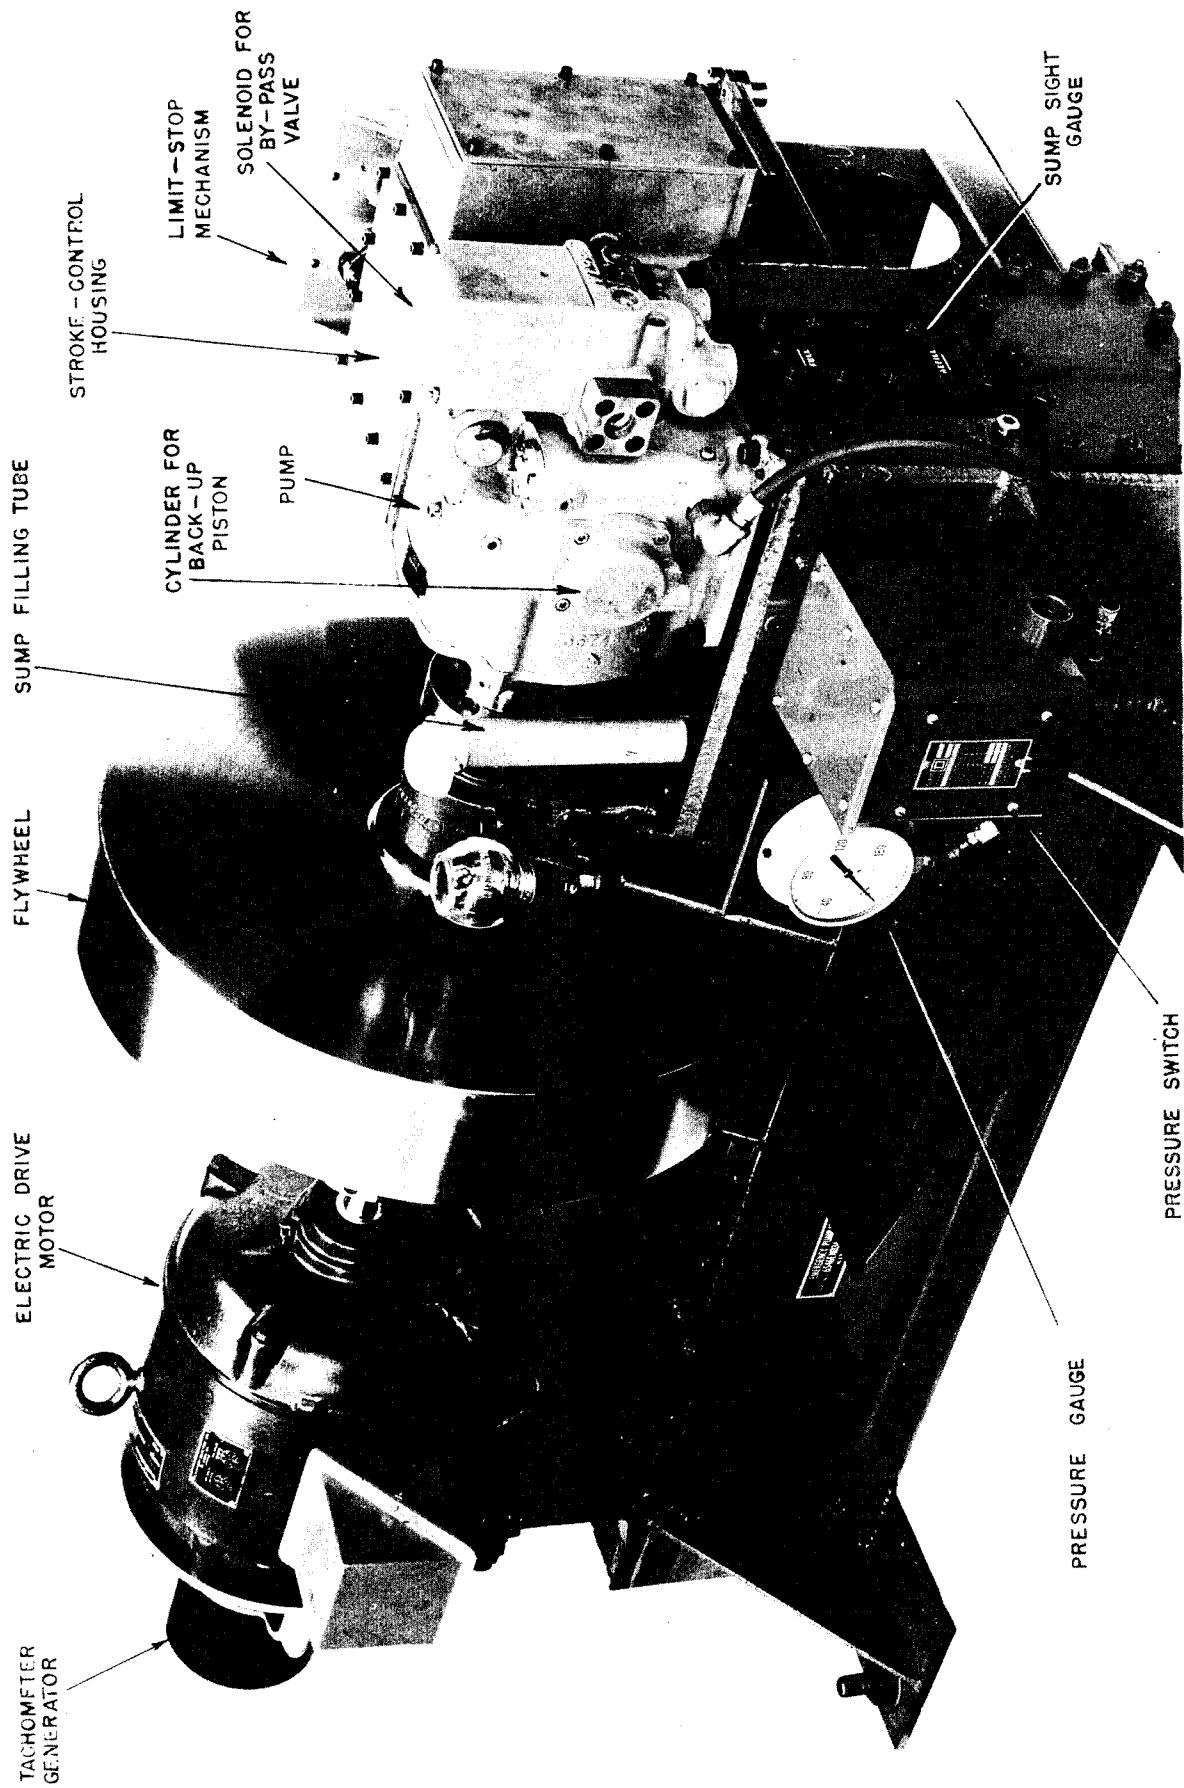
EMERGENCY PUMP ASSEMBLY
